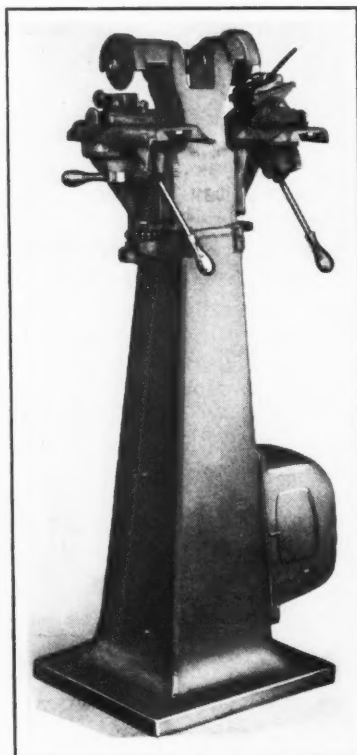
H & G Chaser Grinder with Enclosed Motor Drive
